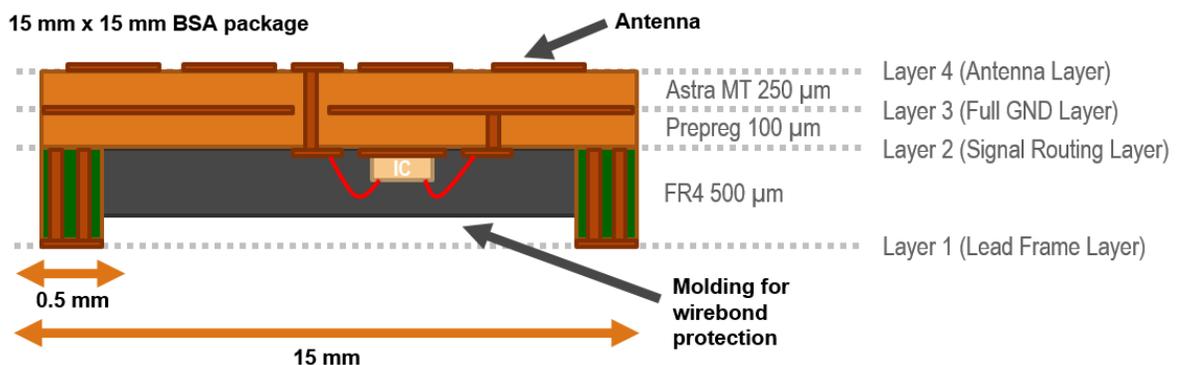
60-GHz TRM BSA package PCB stack-up.
